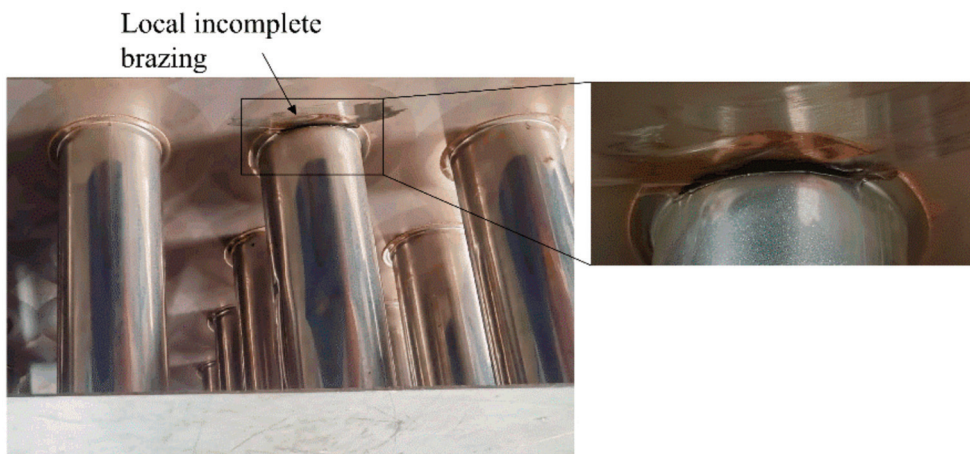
SS core panel specimen with a prefabricated local incomplete brazing defect.
